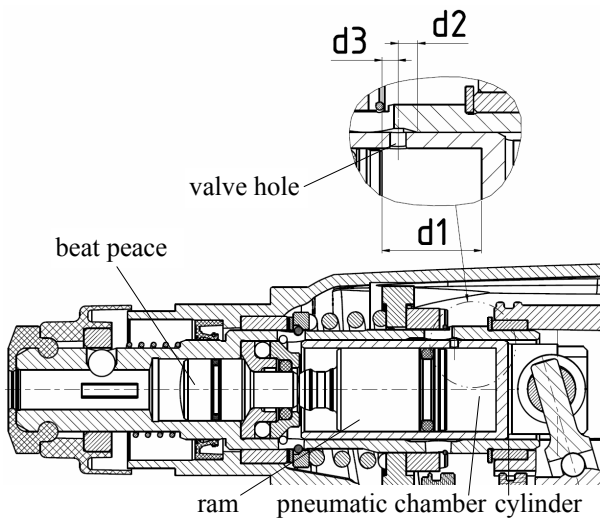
Geometry dimensions explored and valve in the cylinder wall
